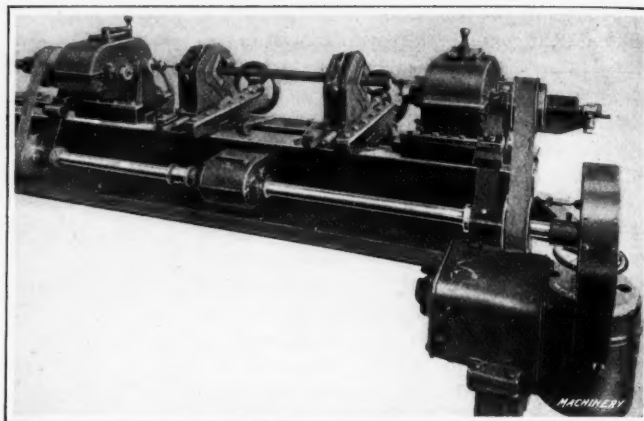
Close View of Pawling & Harnischfeger Centering Machine working on Shaft $1\frac{1}{8}$ Inch in Diameter by 30 Inches Long
